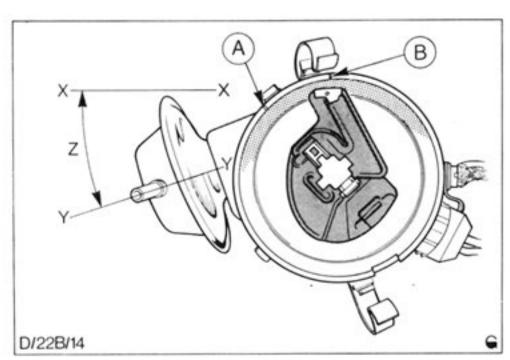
Distributor ready to be installed with rotor arm lined up with dot on housing.
